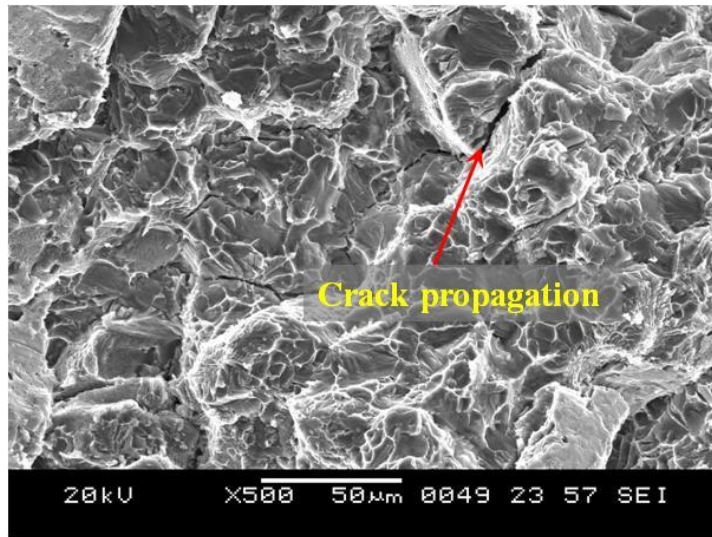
Fractograph showing crack propagation in cast aluminium tube
